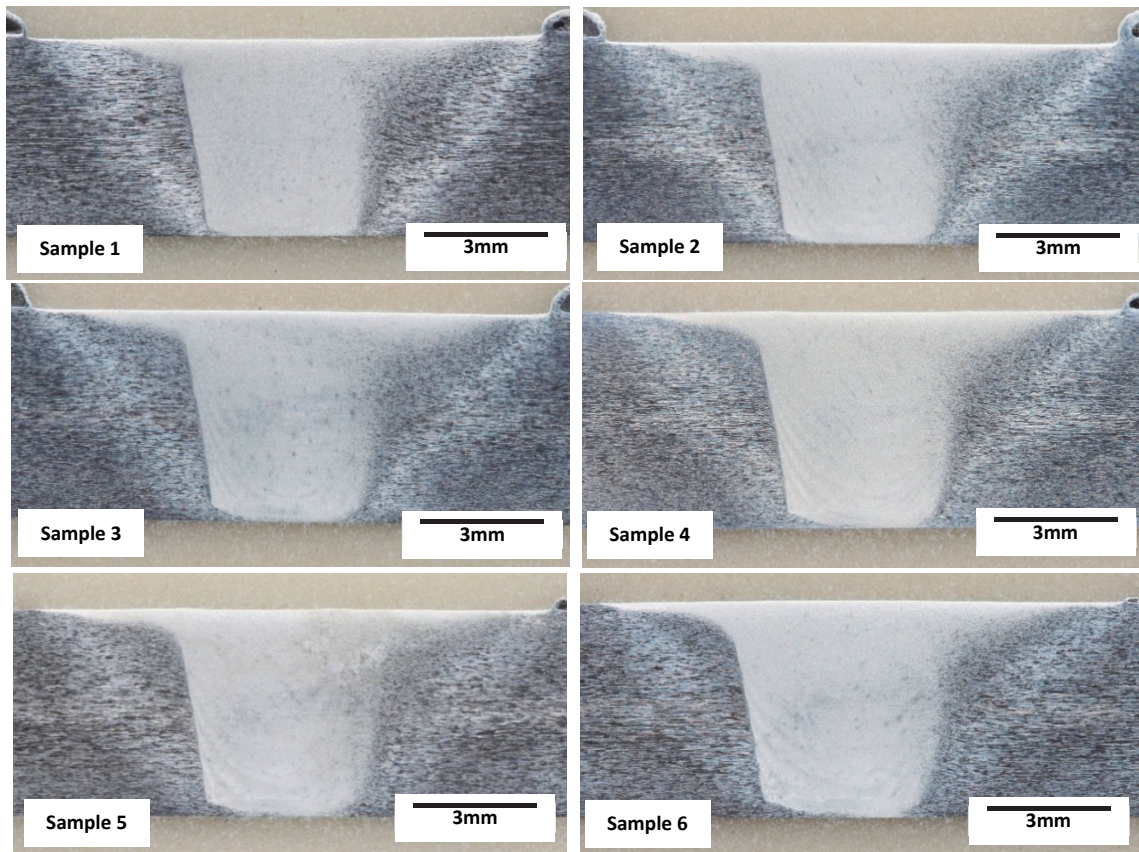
Macroscopic analysis of weld in cross-section
